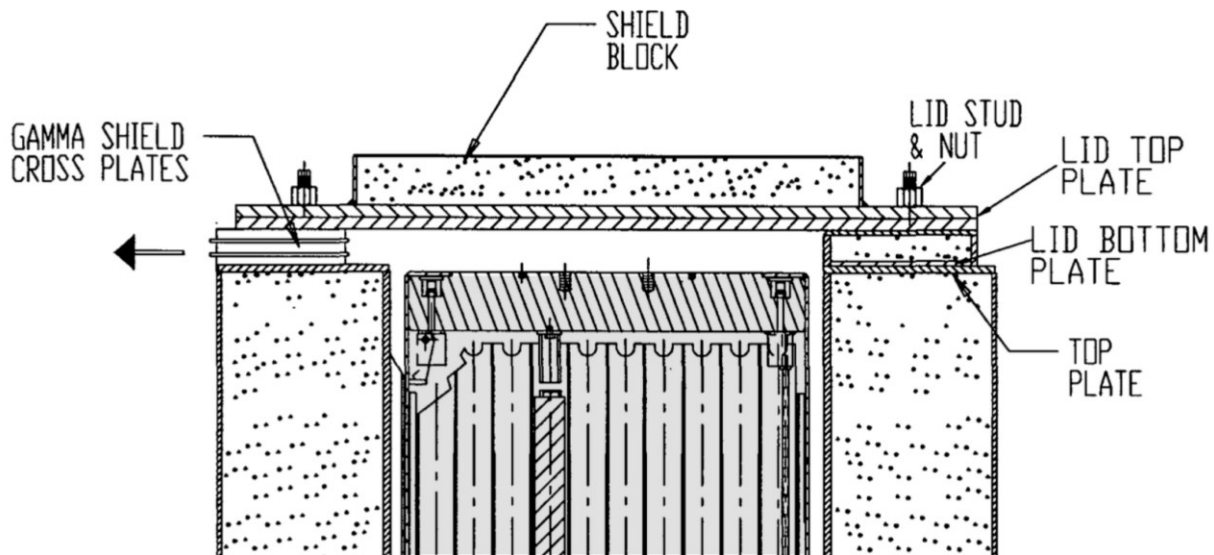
Top view of ventilation opening from Holtec drawings.
